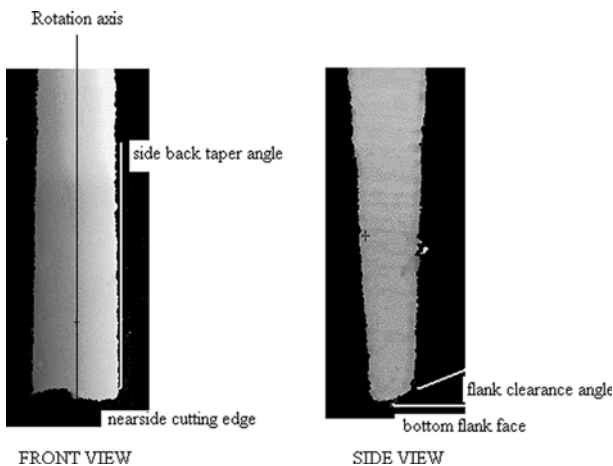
White-light interferometric micrographs from which milling tool topography was extracted to determine edge radii and angles
